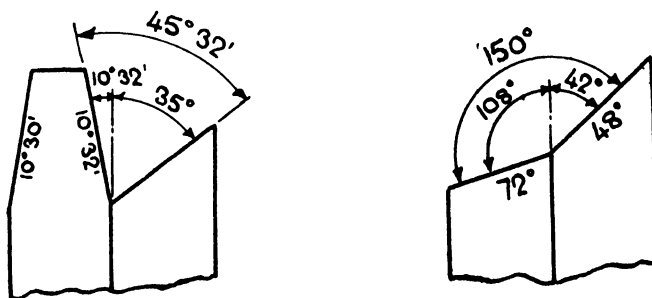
D.—METHOD OF COMBINING JOHANSEN ANGLE GAUGES
